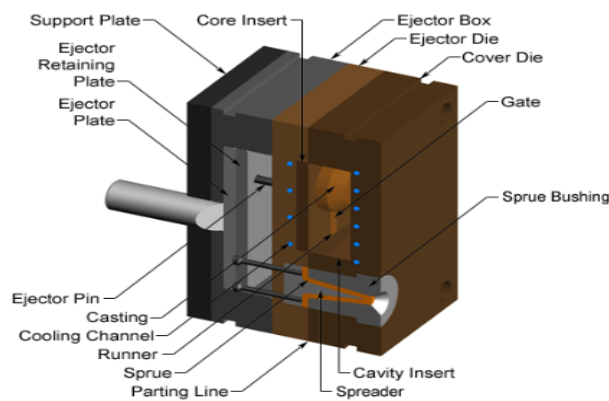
Example of a Die Casting Mold in Graphic View[28]
